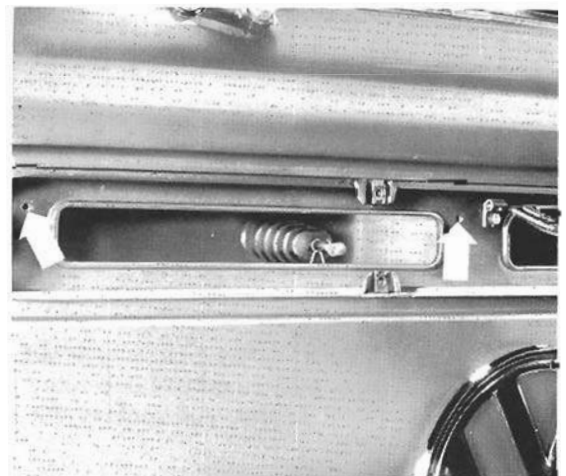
Rubber boot and connecting rod installed in body. Arrows indicate holes for flap bearing retaining screws.
